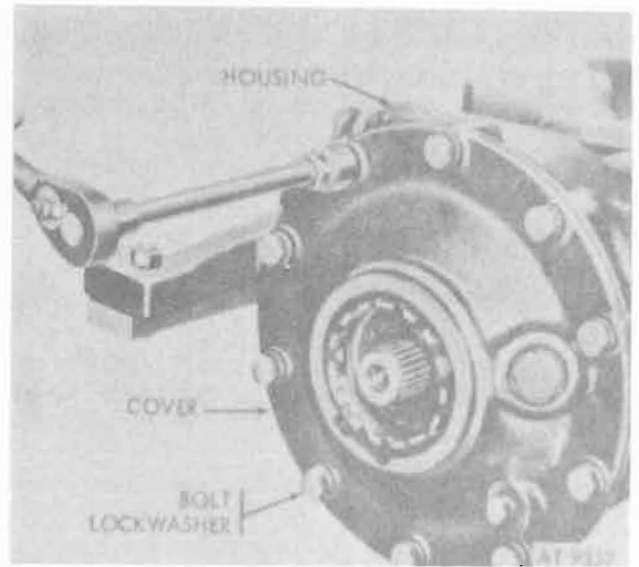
Housing cover plate retaining bolts and lockwashers.
